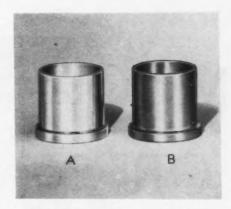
Typical sprayed metal bearings. Bearing A was made by spraying a 0.020-in. coating on the mandrel and then spraying on 1/16 in. of aluminum. Bearing B is plain sprayed bronze 1/16 in. thick.
